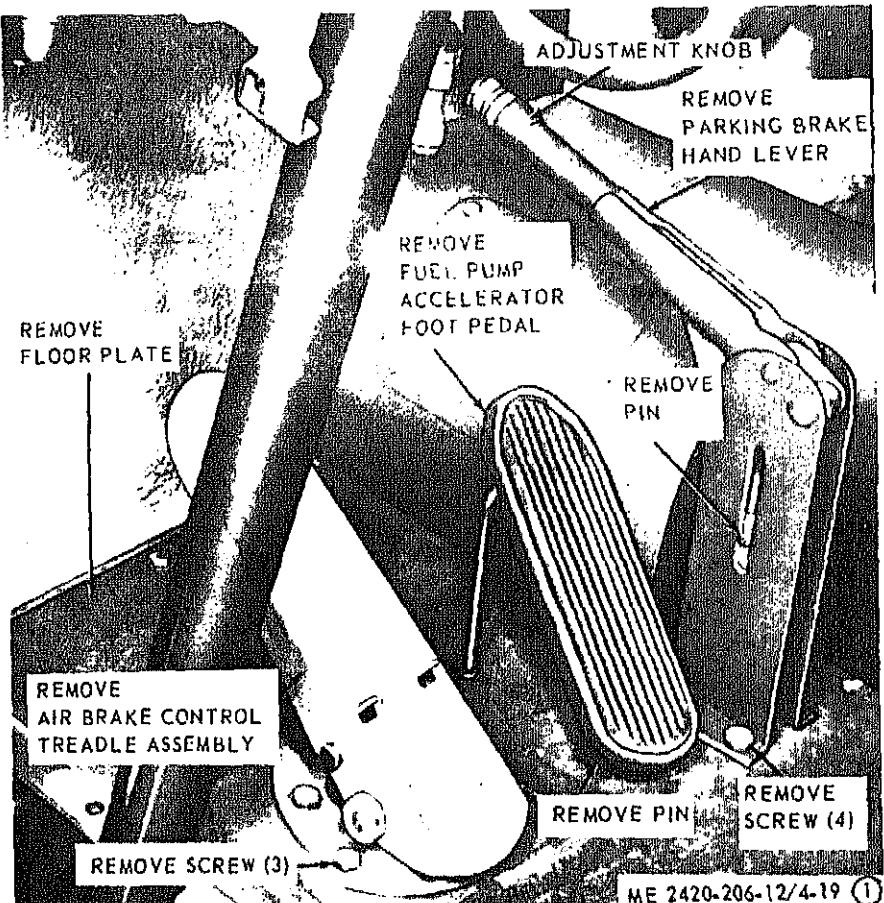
Parking brake hand lever and cable, removal and installation (sheet 1 of 2).
